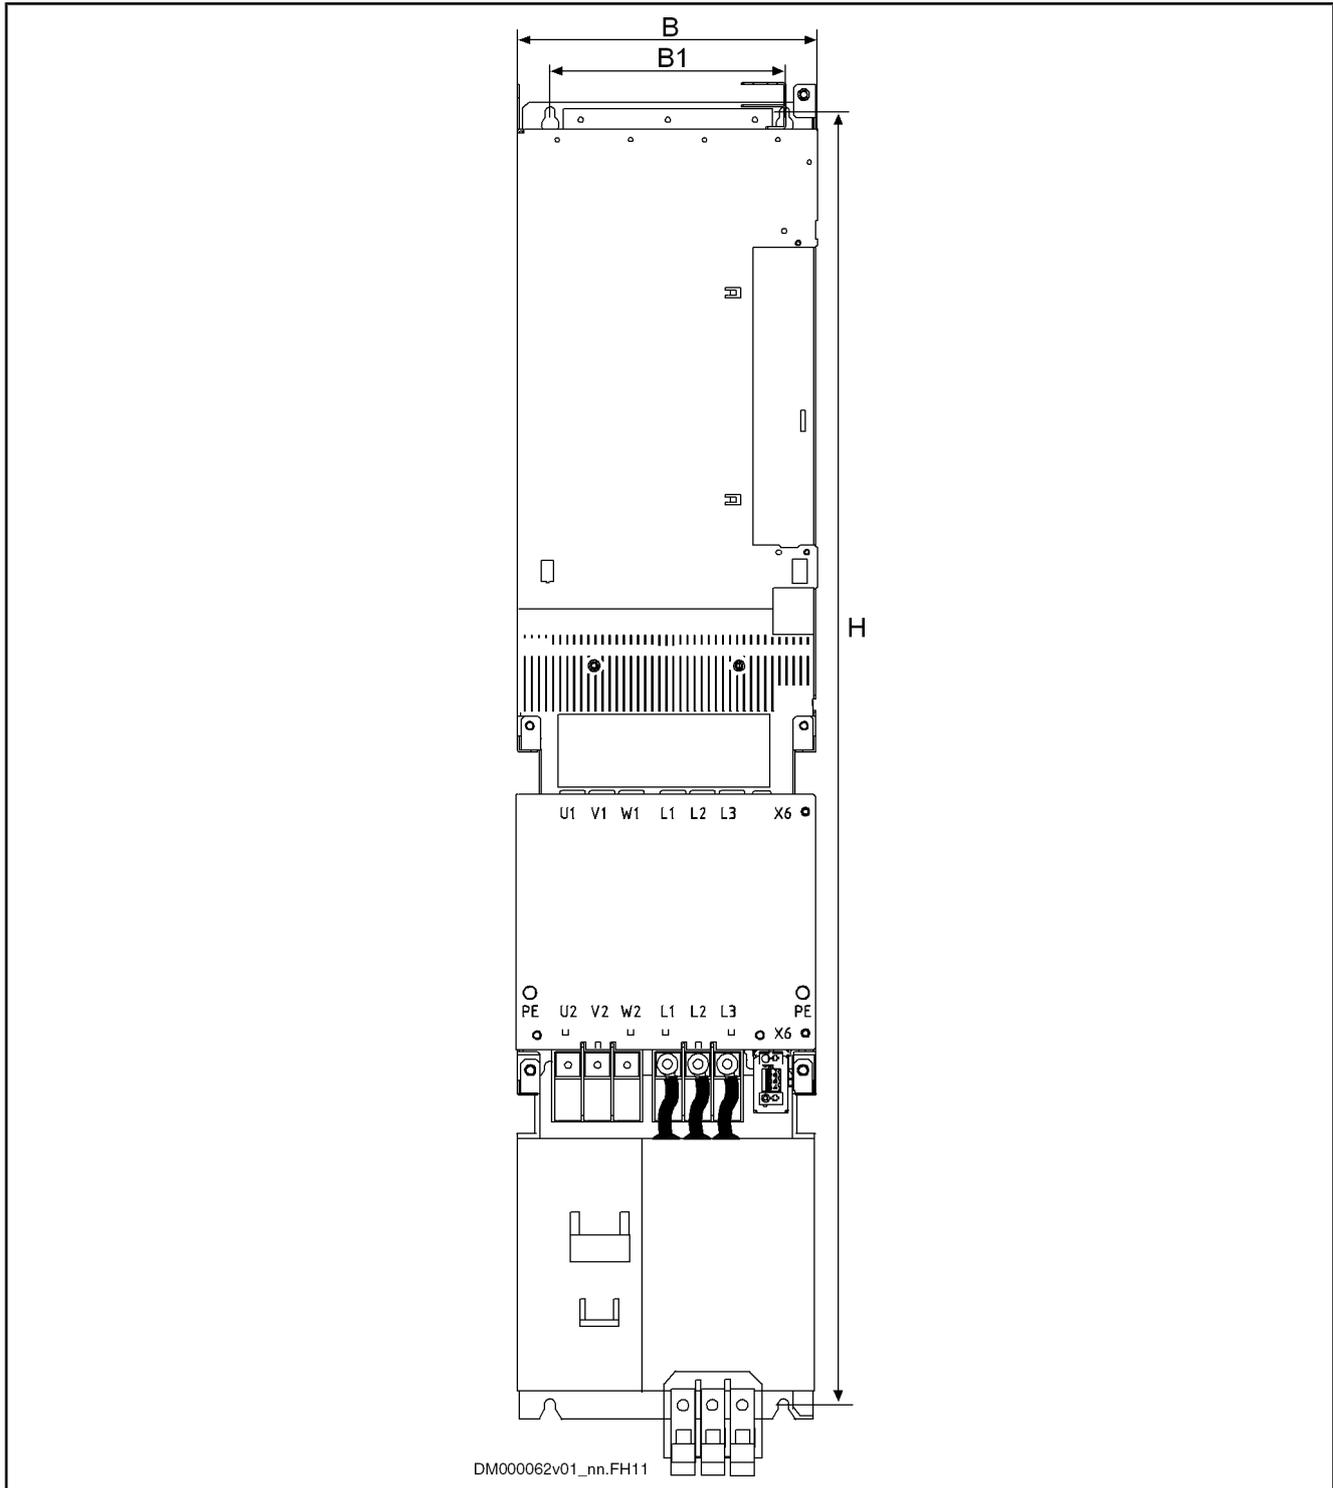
Arrangement of device 0100, 0150, 0210 / motor filter and mains filter
